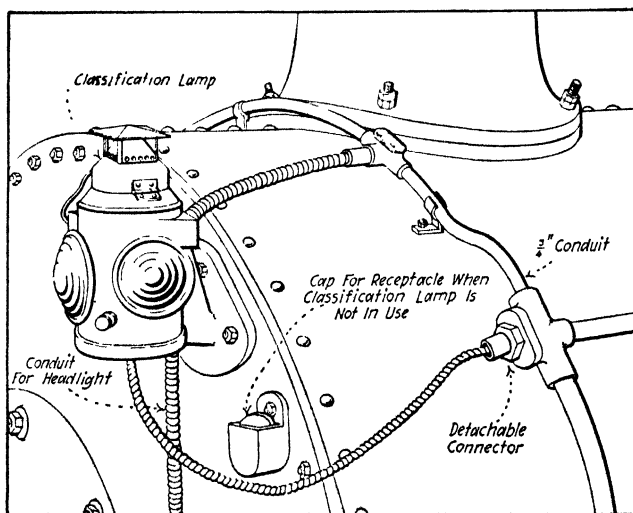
Conduit wiring on front end of the boiler, left side.
